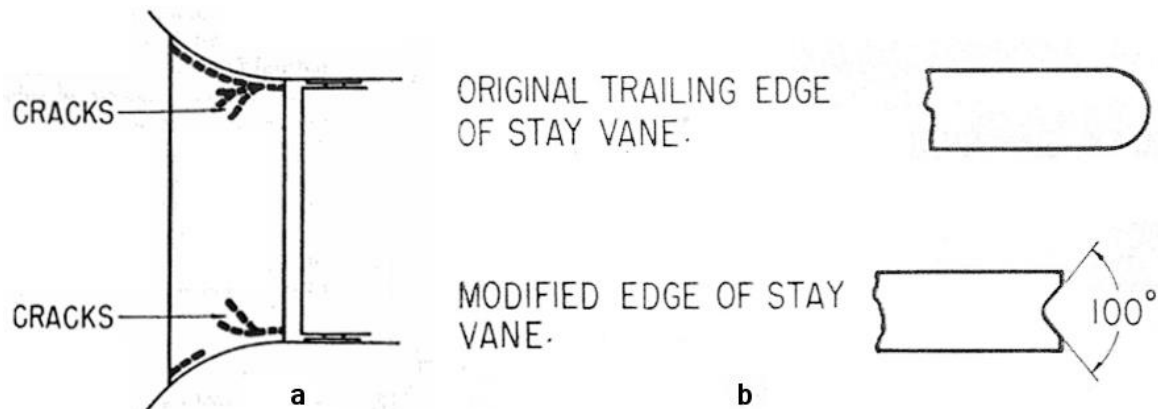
Little Long Generating Station: a – sketch of stay vane cracks;
